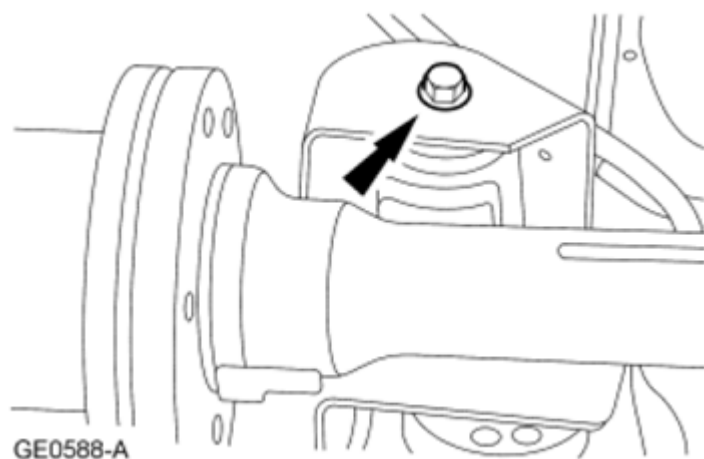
Locating Axle Shaft Housing Carrier Bushing Bolt
